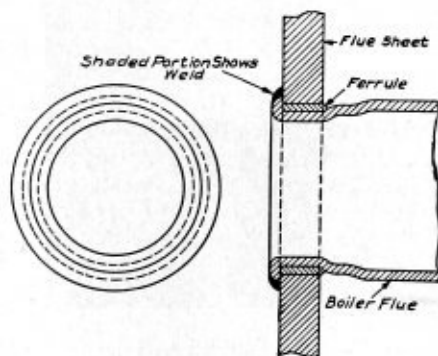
Diagram Showing Proper Method of Welding Flues to Flue Sheet
